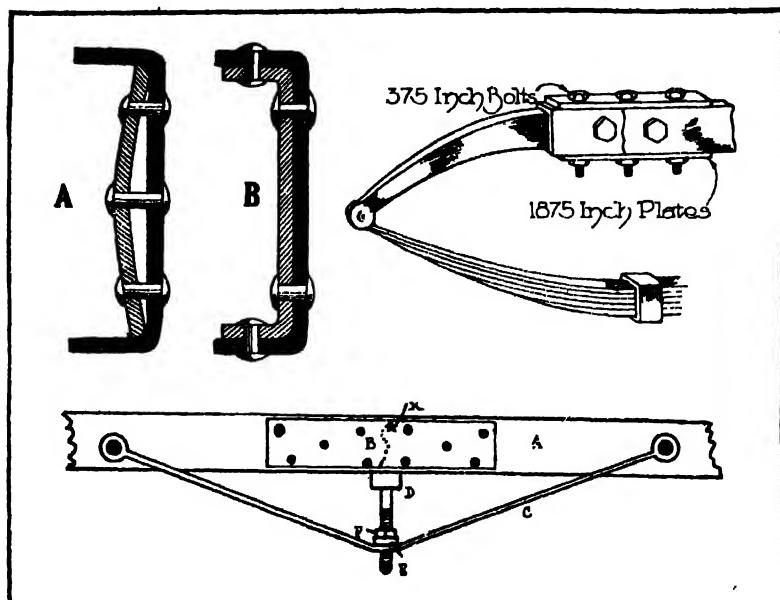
Methods of Repairing Cracked Frame Side Member.
